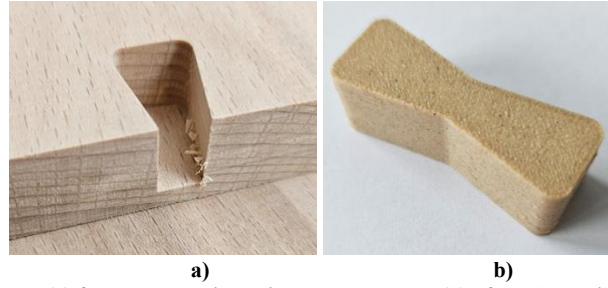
Machined slot (a) for connector insertion and geometry (b) of the dovetail-shaped connector.
